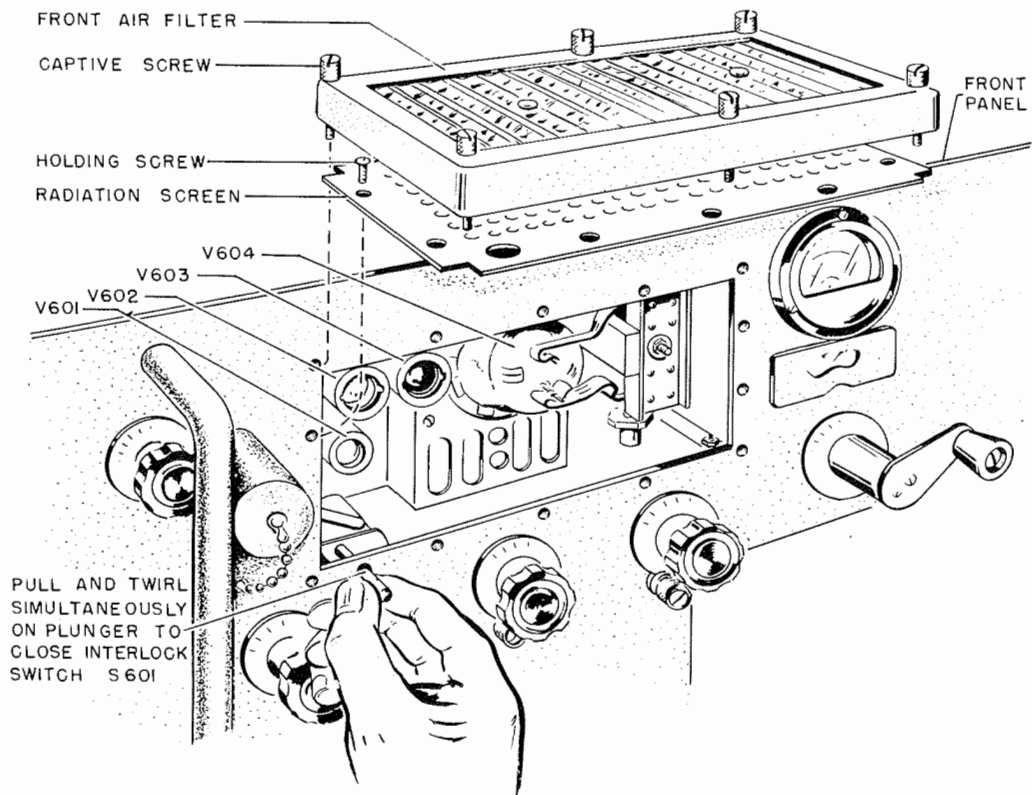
Radio Transmitter, Removal of Front Air Filter, Tube Location, and Emergency Operation of Front Air-Filter Interlock Switch
